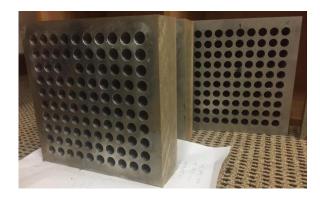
One hole cannot be drilled because the center drill 3.00 mm diameter tool broke down in the Aluminum 6061 workpiece.
